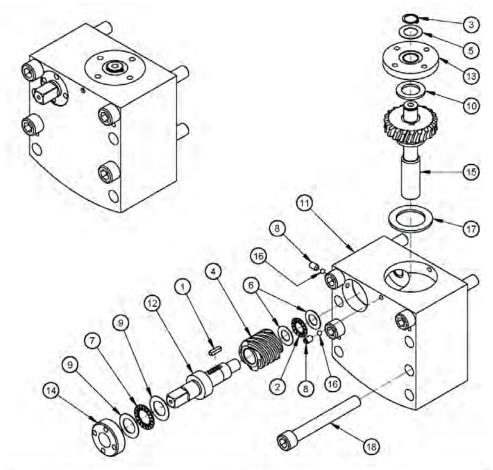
Manual feed assembly for axial feed (P/N 41064)
